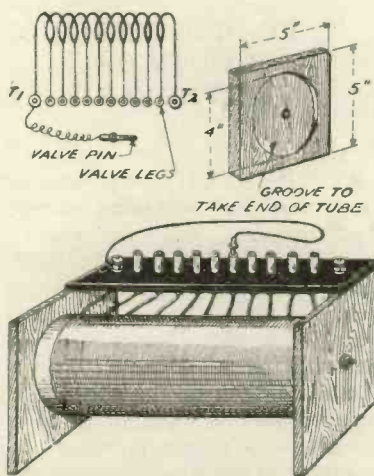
The complete details of the tuner and wooden end-pieces.
